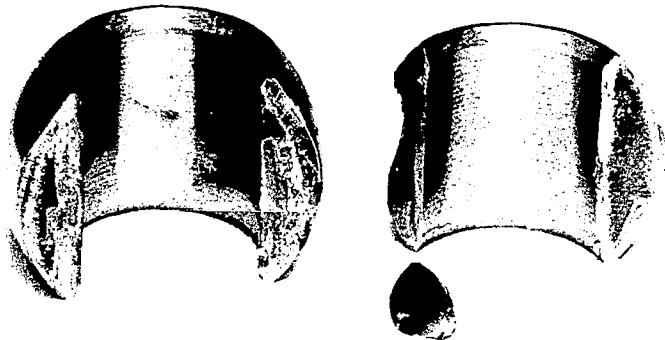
Close-up View of Fractured Drilled-Ball Segments – Drilled-Ball Bearing S/N 2600A-1
